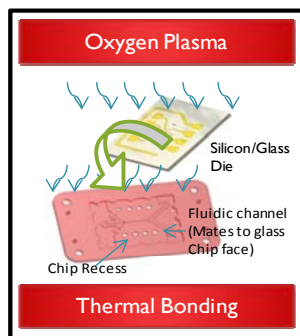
Surface modification and assembly of die into the molded fluidic module.
